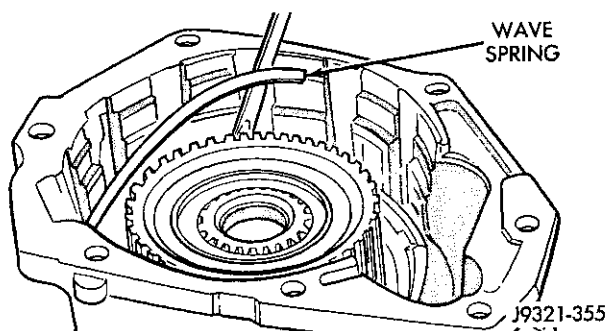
Overdrive Clutch Wave Spring Removal/Installation
